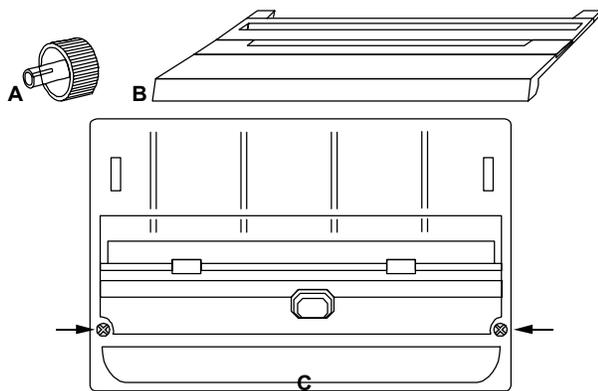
A) Platen knob B) Access cover C) Overhead view of printer, showing the screws that hold the top cover in place
